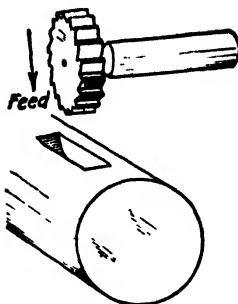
Straight-shank Woodruff Keyseat Cutter.
